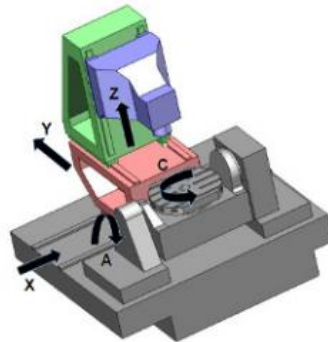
5-axis machining equipment with table tilt A-C and X, Y, Z axis. Reproduced from [20]
